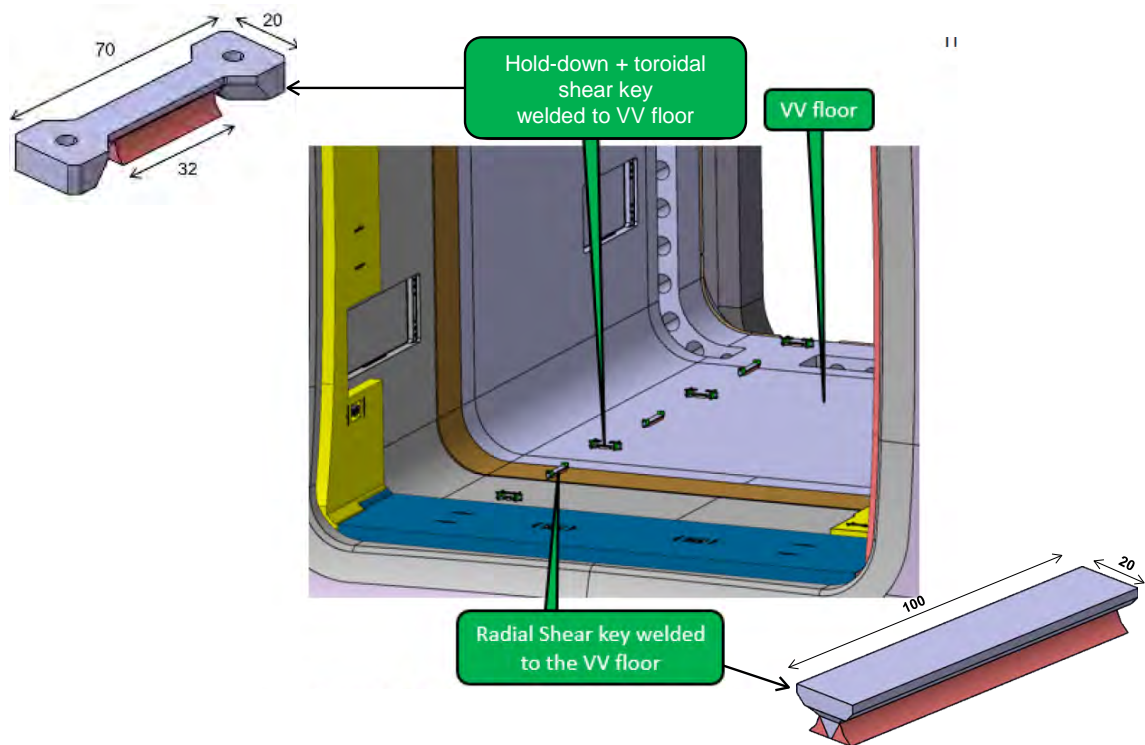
View of the rectangular keys welded to EQ Port Extension floor before rails installation.
